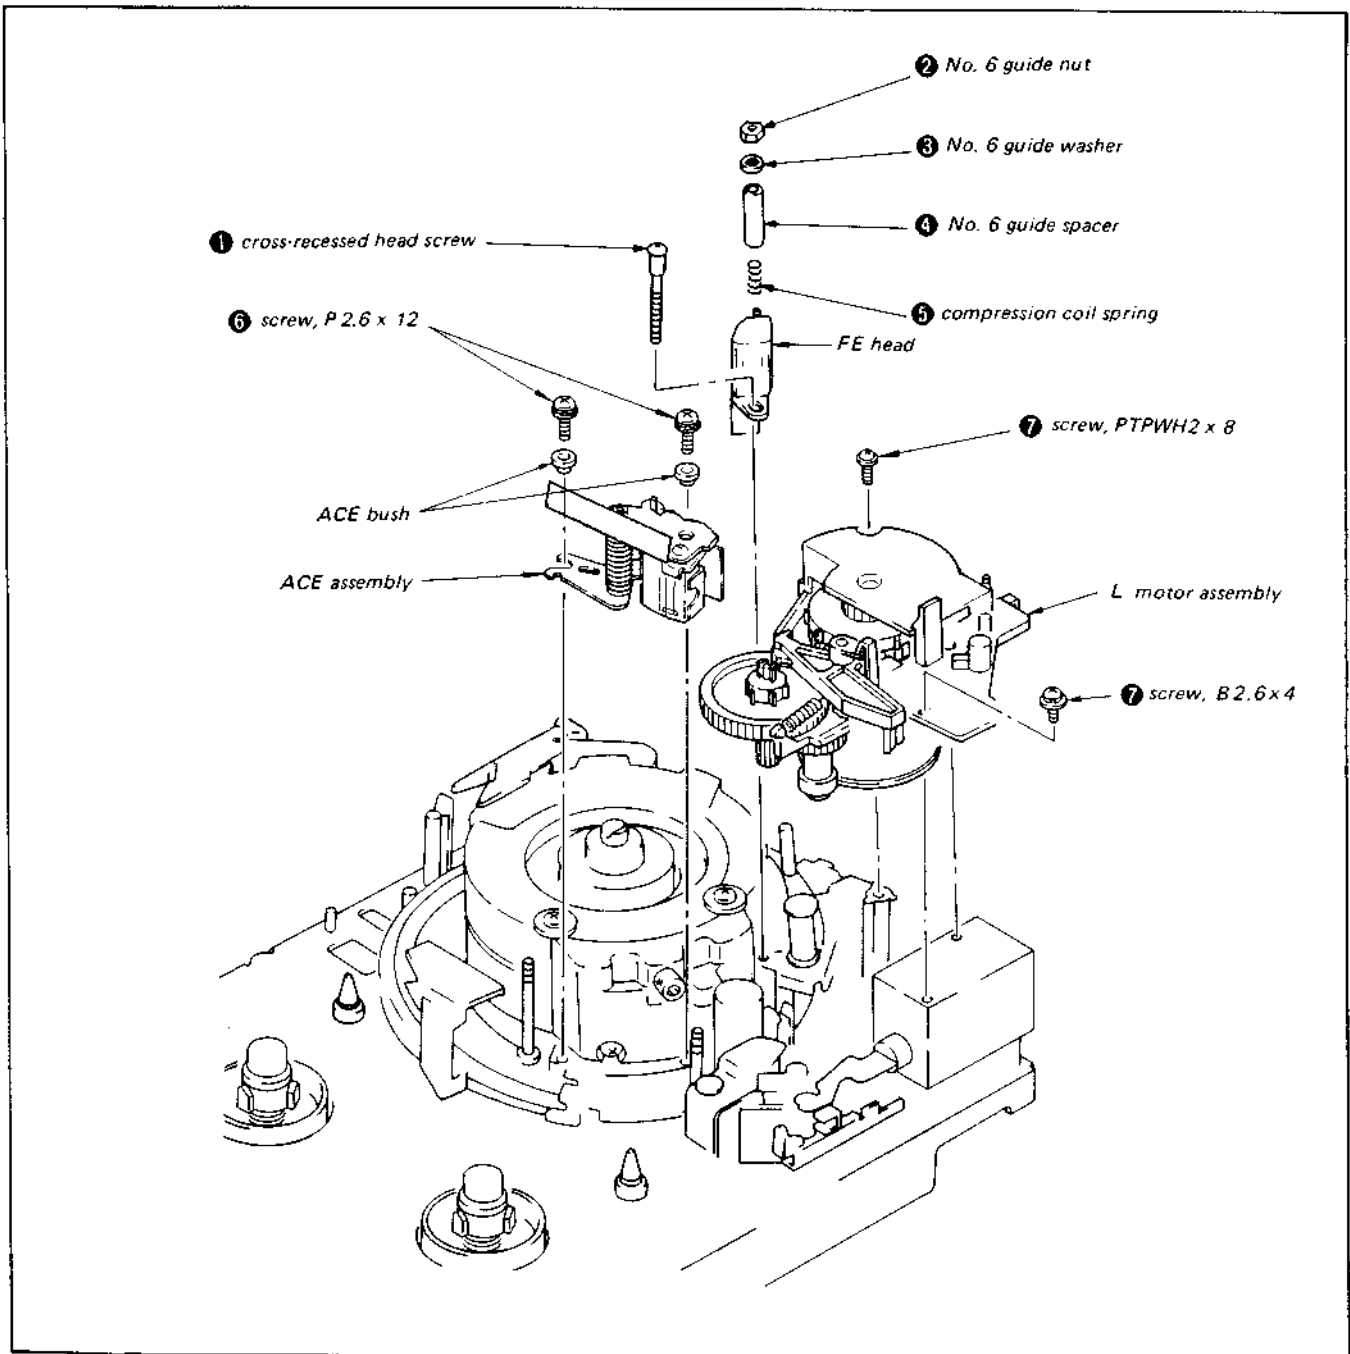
Removal of the ACE assembly, FE head and TE motor assembly
